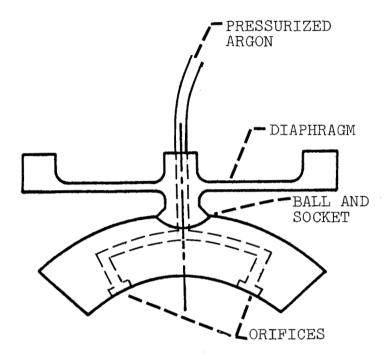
PIVOT AND EXTERNAL PRESSURIZATION ARRANGEMENT. RADIAL FLOW TURBOCOMPRESSOR JOURNAL BEARINGS.
